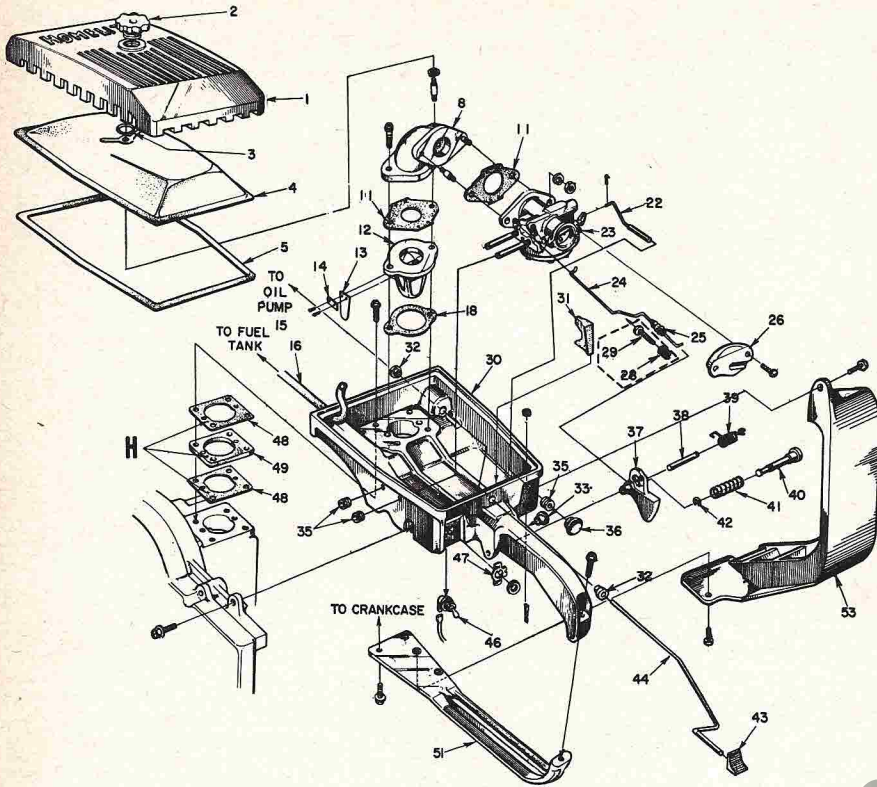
B Exploded view of C-Series air box assembly (throttle handle) and related parts. Models C-5, C-51 and C-71 have integral elbow (9) and reed valve unit, Models C-9 and C-91 are equipped with pyramid type reed valve assembly (14, 15, 16 & 17). Air deflector (36) is used on late production Models C-7 and C-9 and can be installed on earlier production C-7 and C-9 units if clearance in air box is adequate and by installing new oil pump rod (41). Nylon pump rod bushing (29) and stop (28) fit only late production air box (throttle handle). Filler block (11) is used with C-51, C-71 and late production C-5 and C-7 elbow and reed valve assembly (9) only. Some models may have external idle speed adjusting screw (refer to 29—Fig. HL51C).
